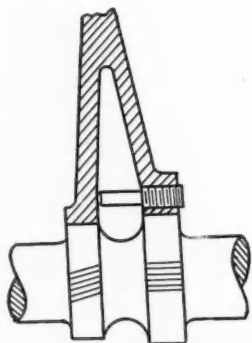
(above)—Diagram of an assembly by torsion + + +
